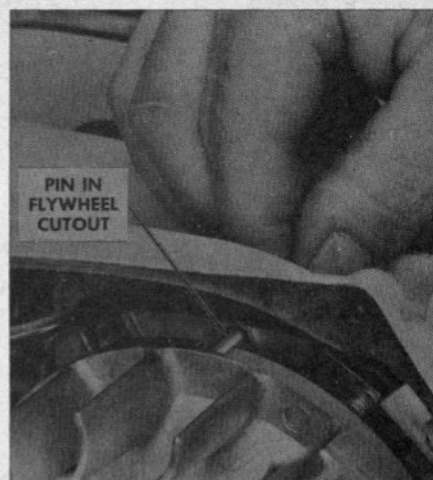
Flywheel can be locked to remove flywheel or clutch retaining nut by inserting pin through hole in crankcase cover into cutout in flywheel.
